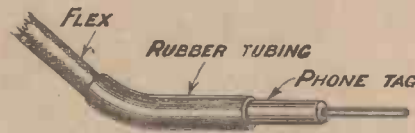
Showing how to connect the rubber to prevent fracture at the tag joint.
